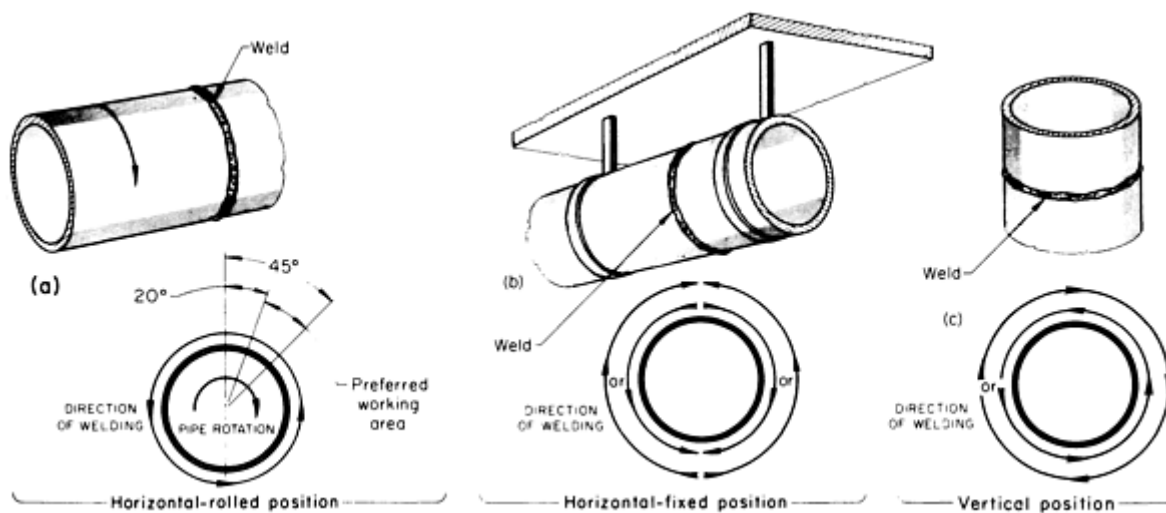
TYPICAL WELDING POSITIONS FOR OXYFUEL GAS WELDING OF PIPE
